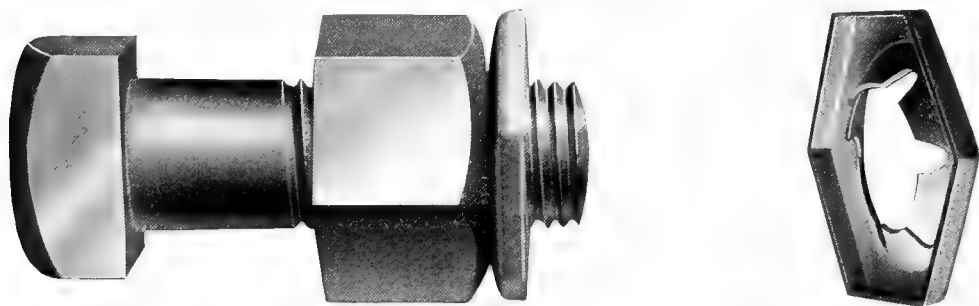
K-P Nut Lock. Waugh Draft Gear Company.
